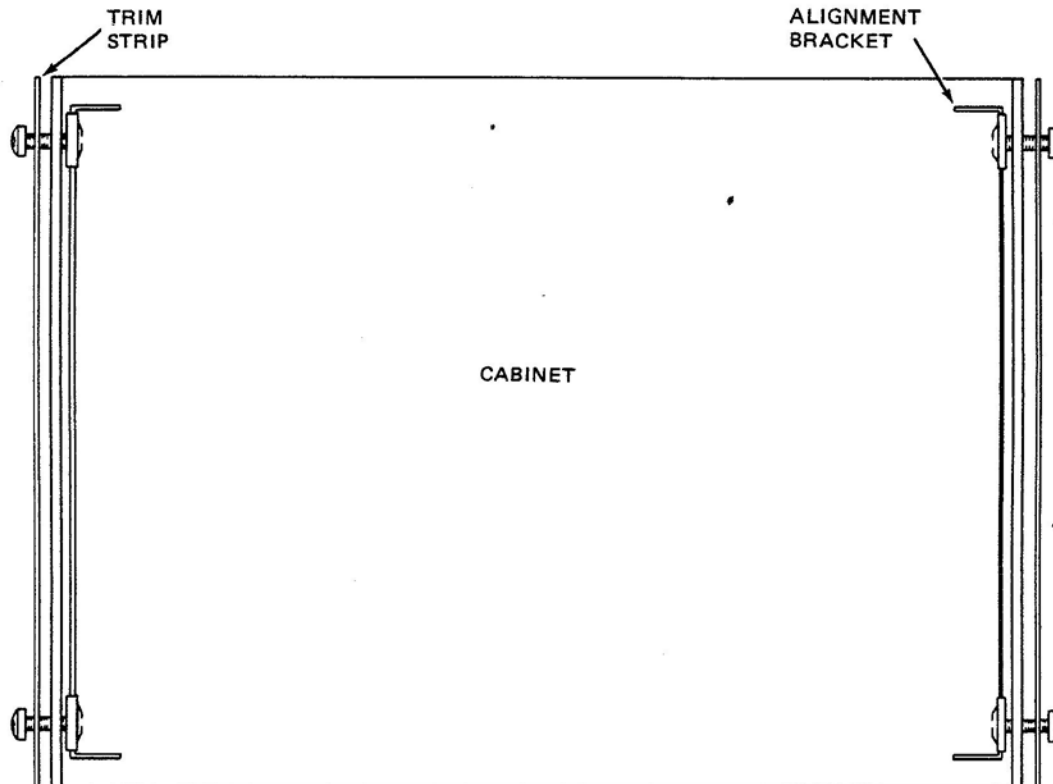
Mounting the trim strips and the alignment brackets on the cabinet bottom.
